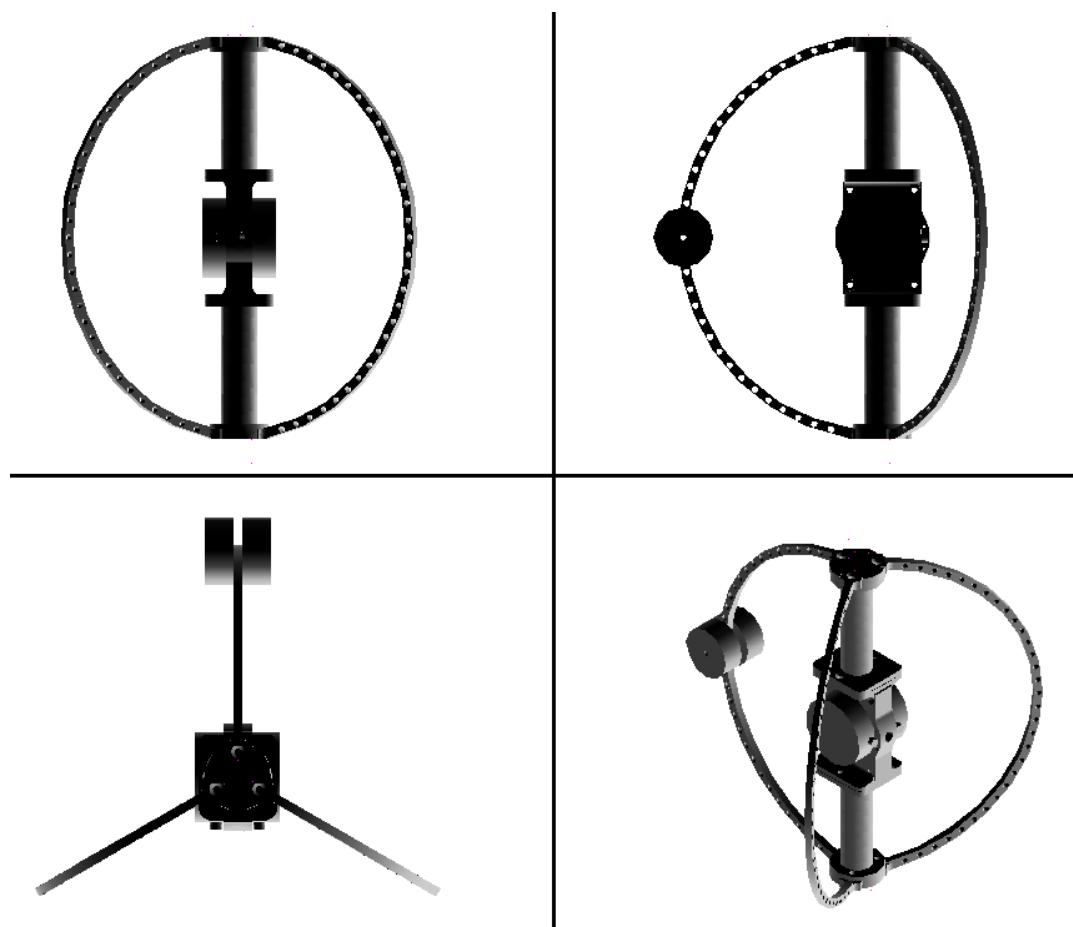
Front view (top left panel), side view (top right panel), top view (bottom left panel) and isometric view (bottom right panel) of the big-weight mounted on the GLM without covers.
